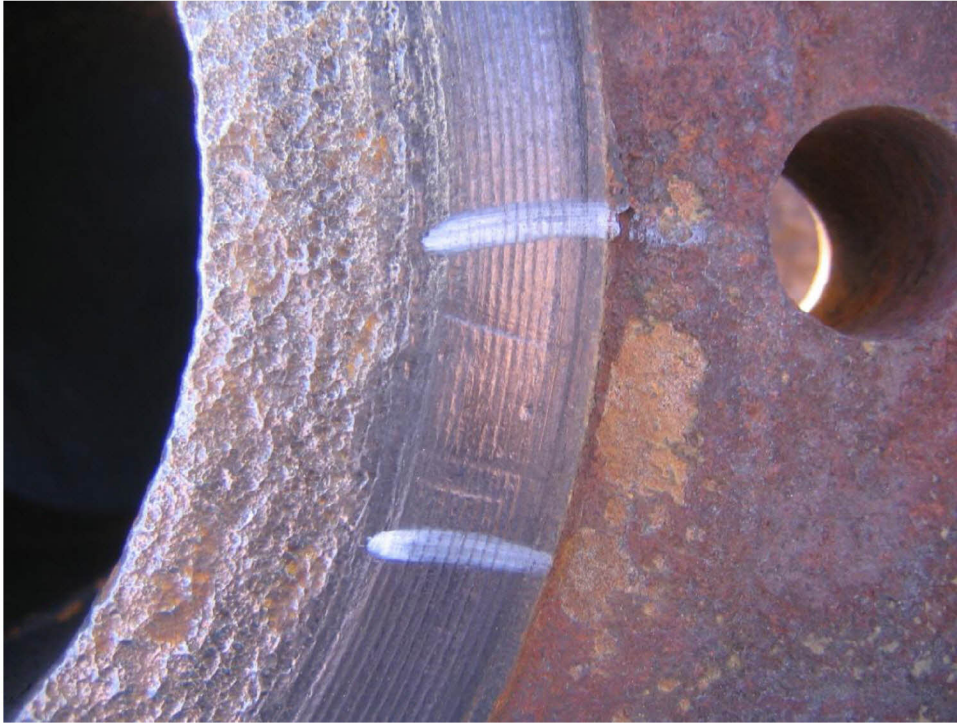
Gasket surface damage to channel nozzle flange.
